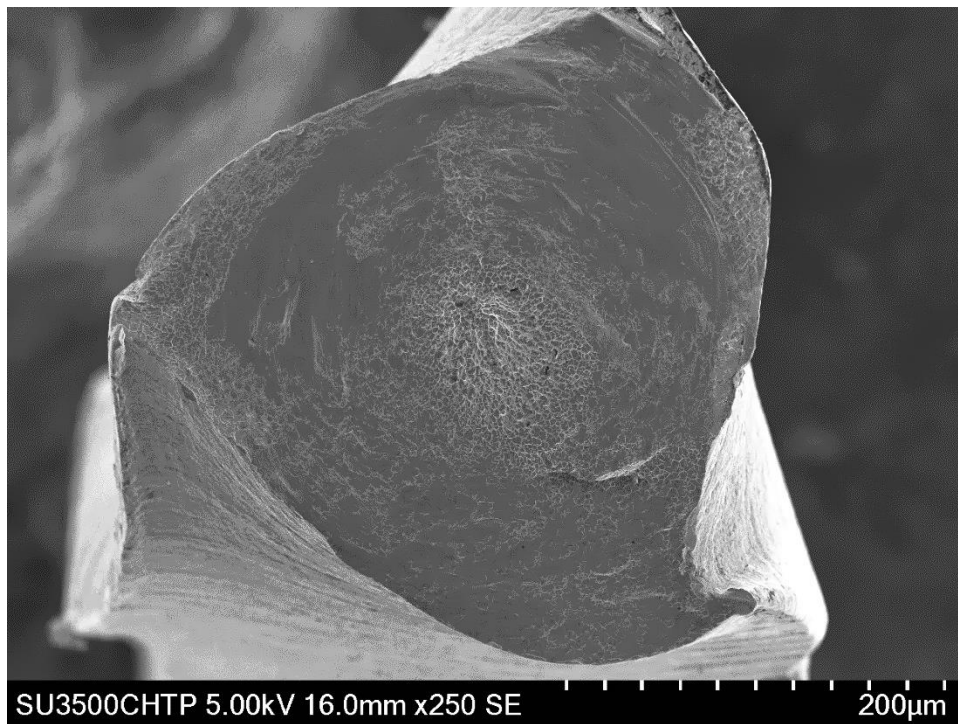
Fractured surface of HyFlex CM file after pure torsional fracture.
